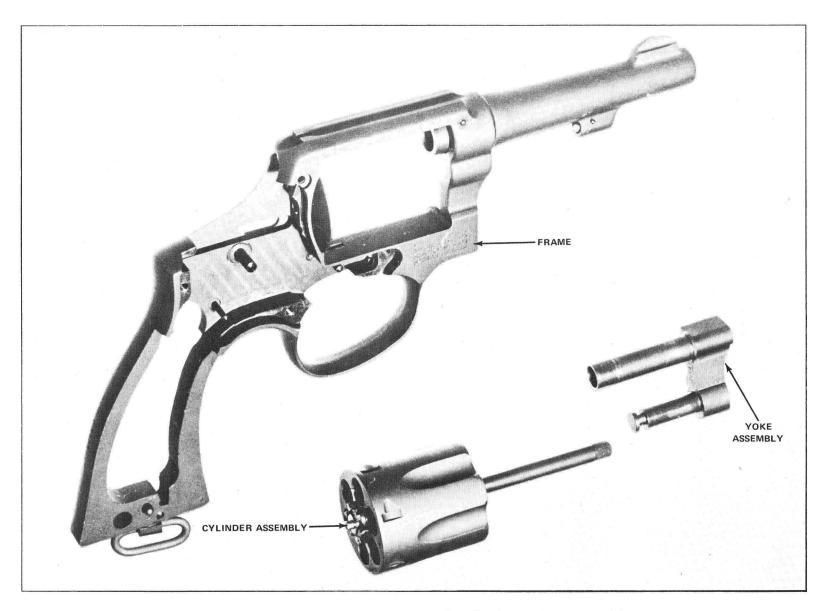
Rightside View of Frame and Cylinder Yoke Assemblies
